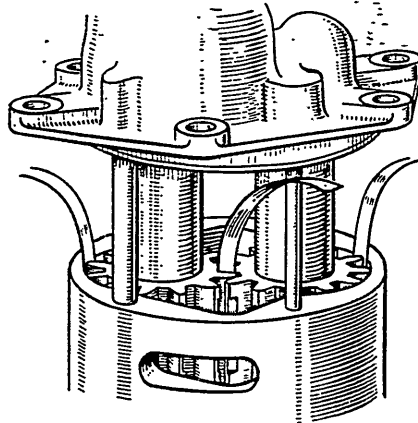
Radial clearance and backlash tests of gear wheel pump
